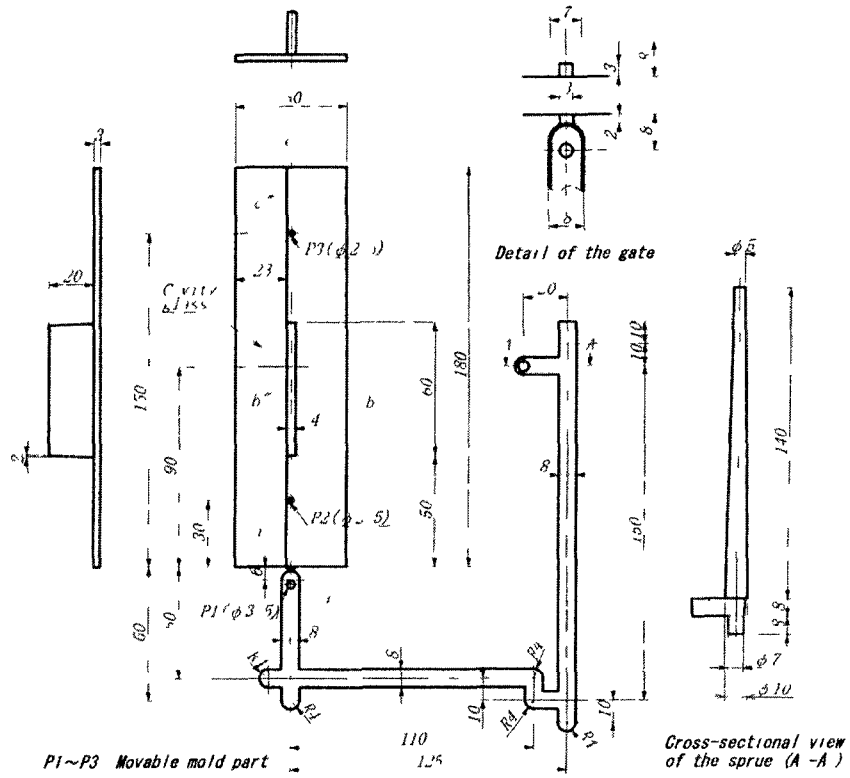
Engineering Drawing of 4 mm Parallel Rib Cavity
